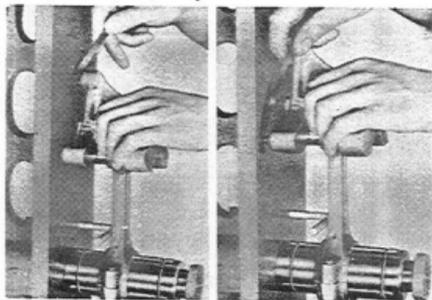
Measuring Connecting Rod for Bend & Twist
